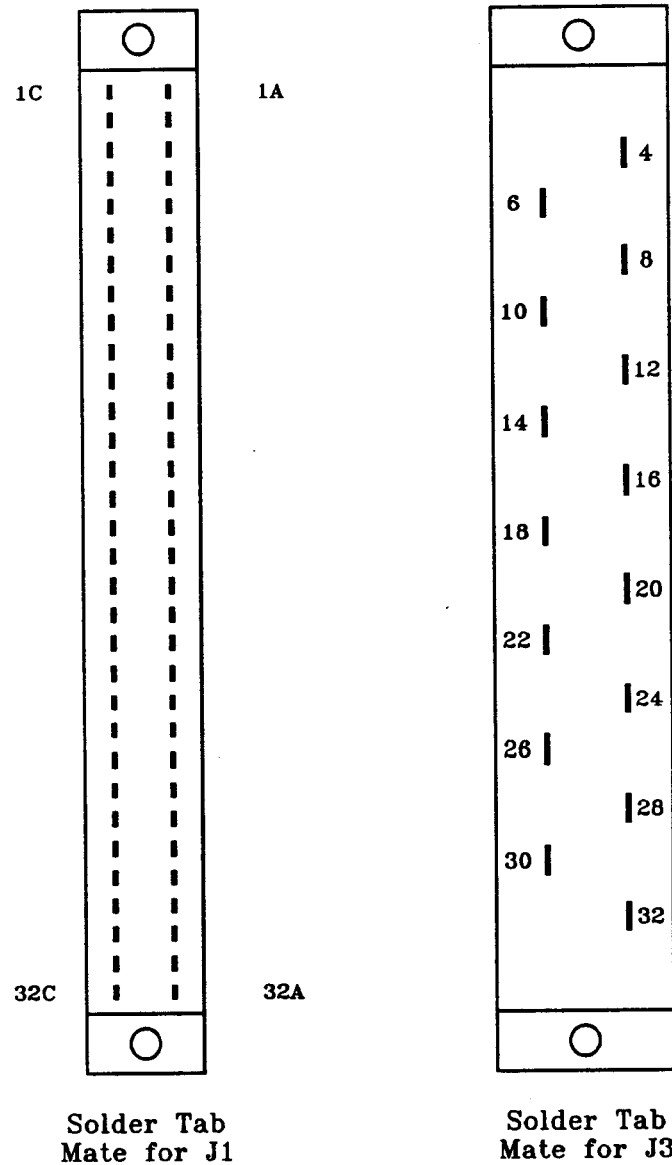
J1 and J3 Mating Solder Tab Connectors
